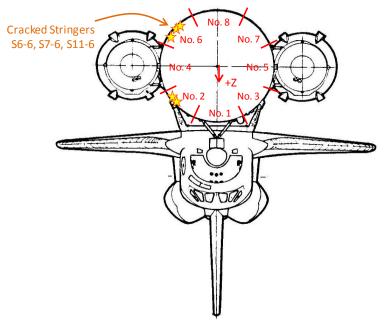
Location of additional stringer cracks detected after ET-137 tanking test and roll-back to the VAB.
